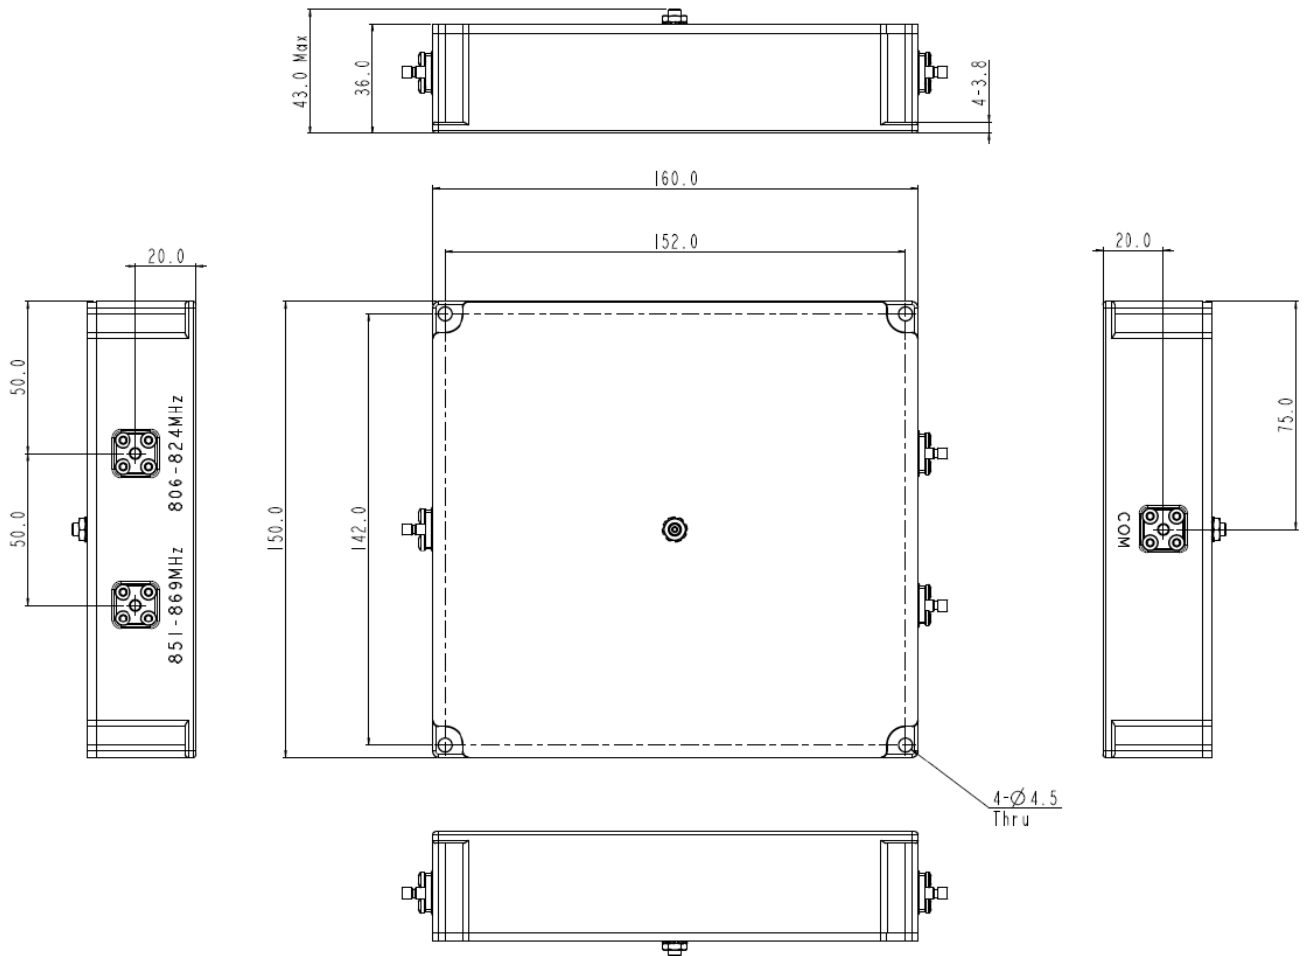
JX-CD2-758M806M-85B Duplexer front panel layout
